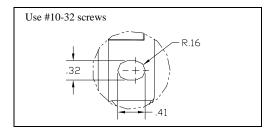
Idea Relay, Mounting Hole Detail (inches)
